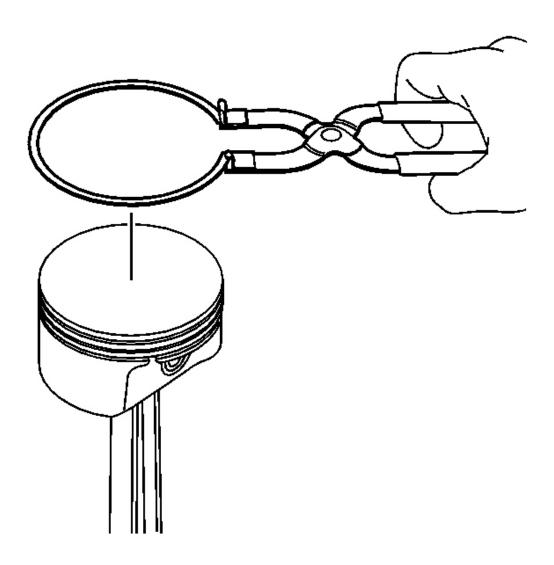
Removing/Installing Piston Rings Courtesy of GENERAL MOTORS CORP.
